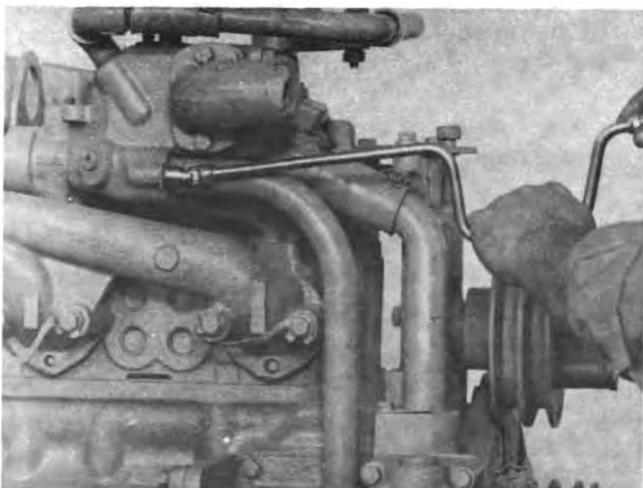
Remove The Capscrew That Holds The Transfer Tube.
